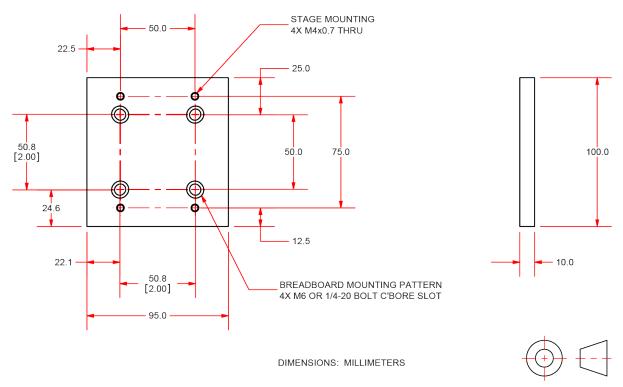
ANT95L-025 Mounting Plate (-MP) Dimensions
